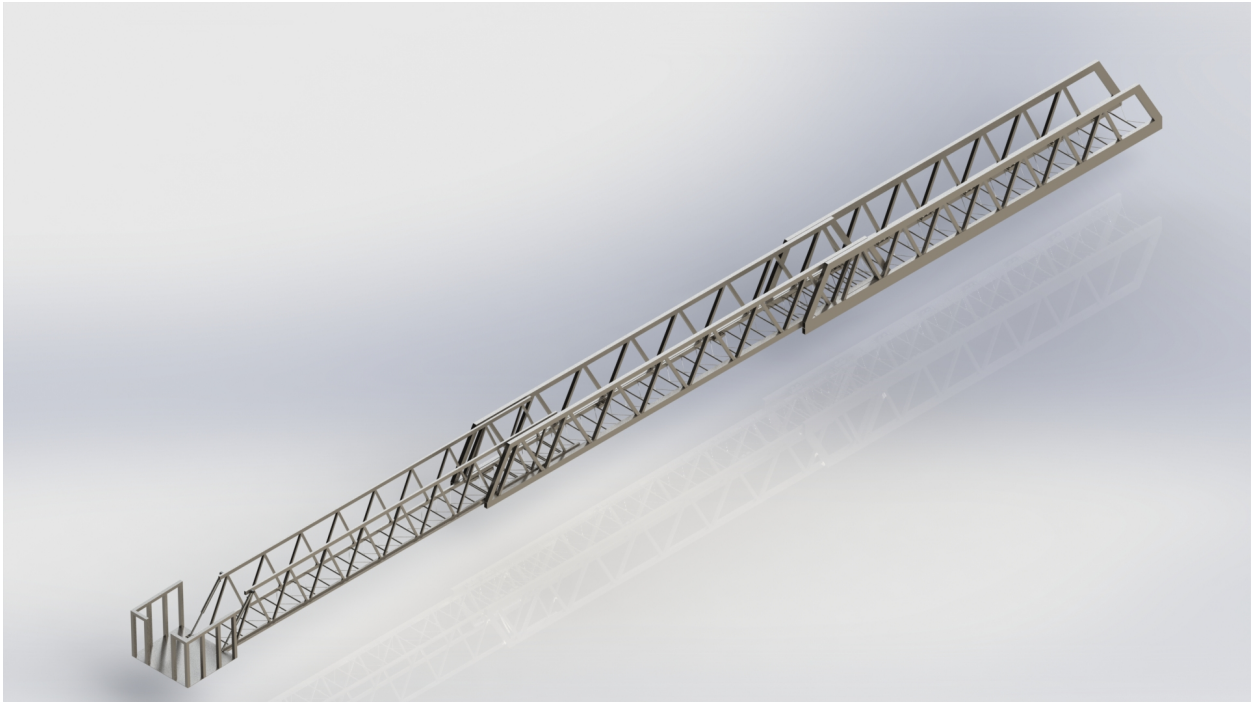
Extended Aerial Ladder Assembly with the Basket Attached
